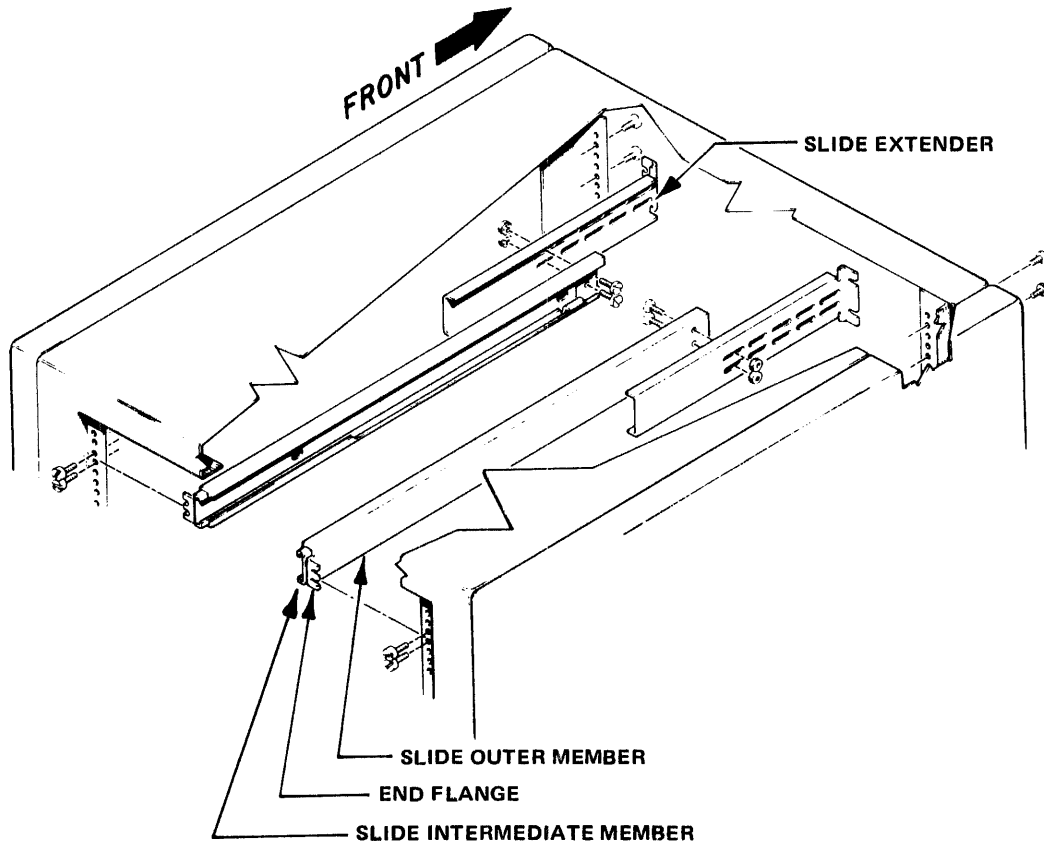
RACK ADAPTOR INSTALLATION (TYPICAL)
